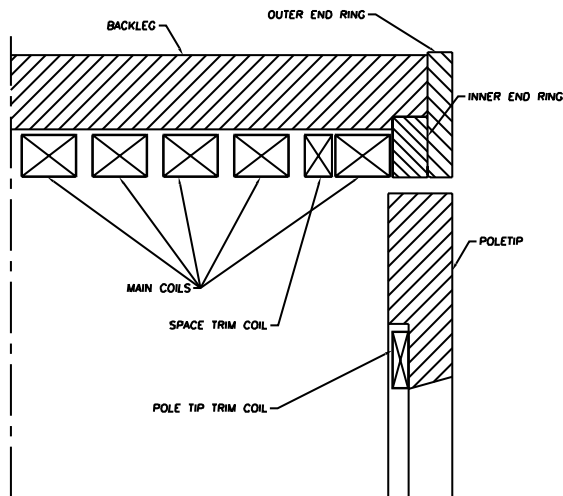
Section drawing of magnet steel and coil locations. Dimensions are given in the text [30].
